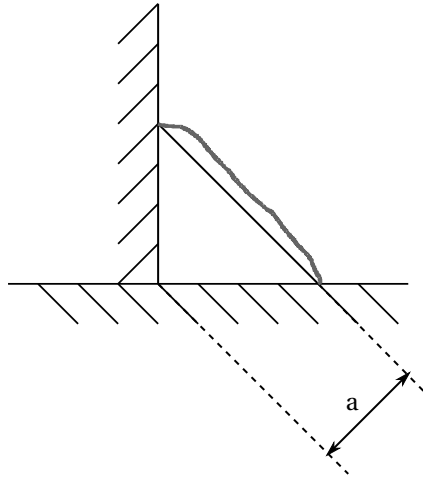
Weld thickness. For a fillet weld, the thickness is determined with a basis in the biggest isosceles triangle that can be fitted into the welds cross-section (Härkegård (2014)). The height of this triangle is the thickness of the weld.
